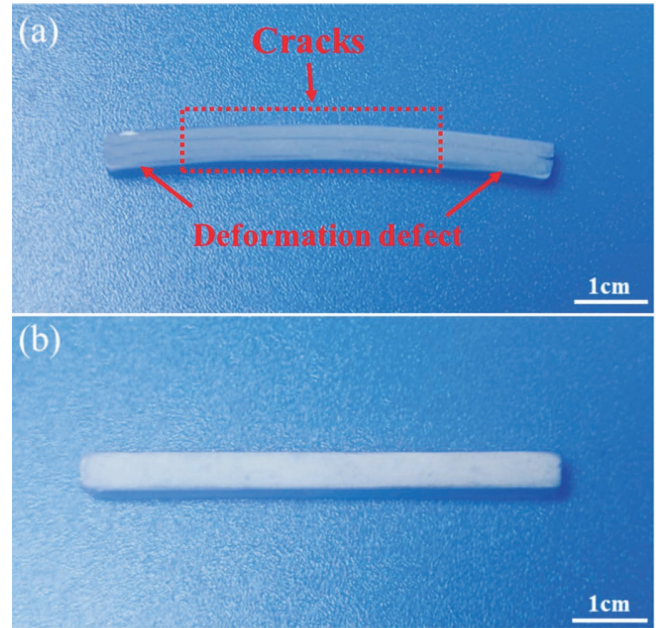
Side view of sintered Si_3N_4 ceramic without (a) removal of carbon, with (b) removal of carbon.
